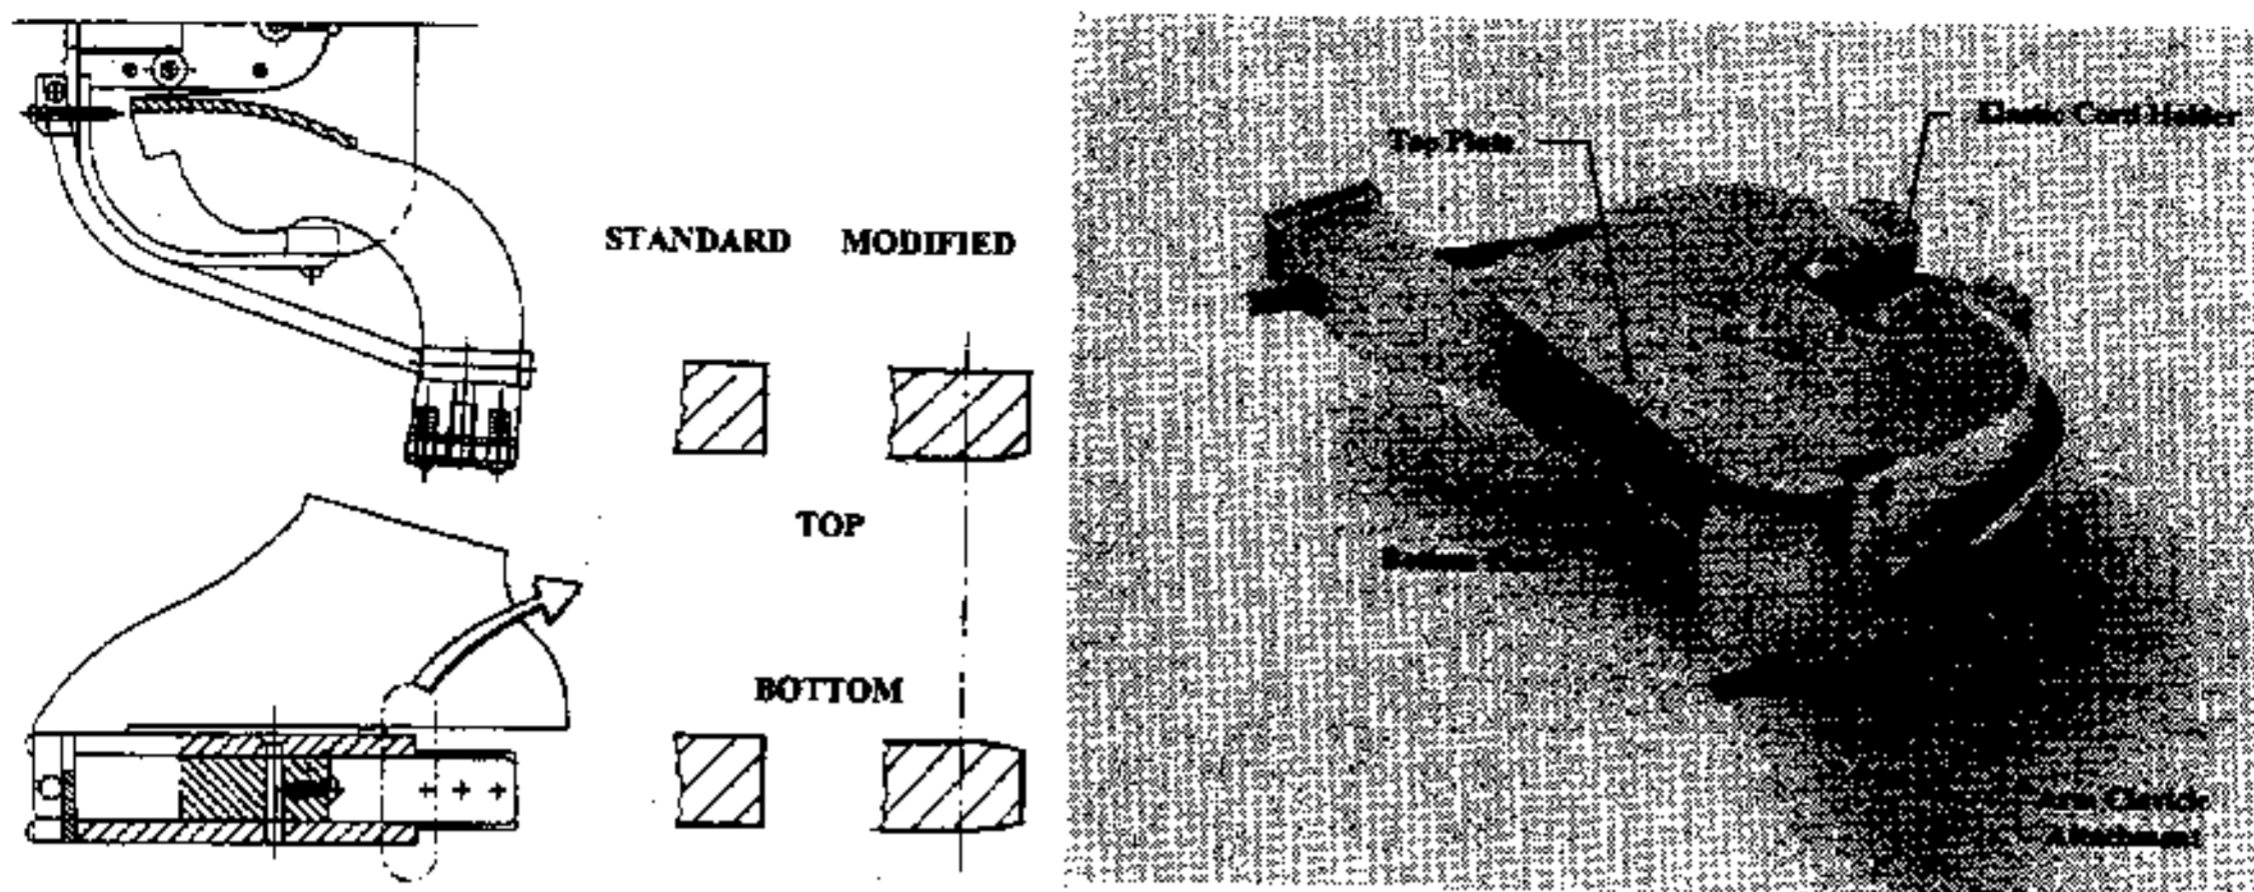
Left: Shoulder top and bottom plate modification; Right: Research Tool Shoulder Assembly (new elastic cord holder, self locking bolt and shoulder foam cap not shown).
